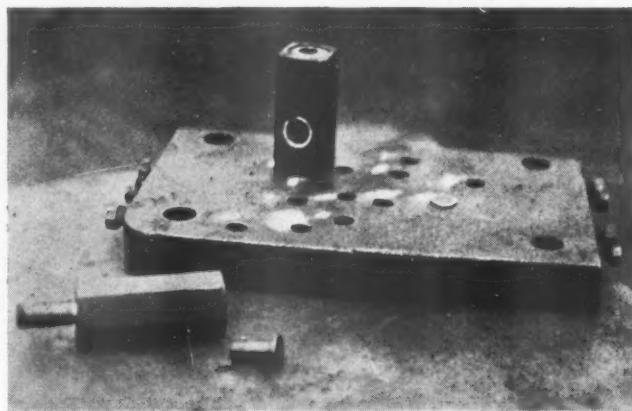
Base plate which is fastened to the machine bed, with a die holder screwed in position
